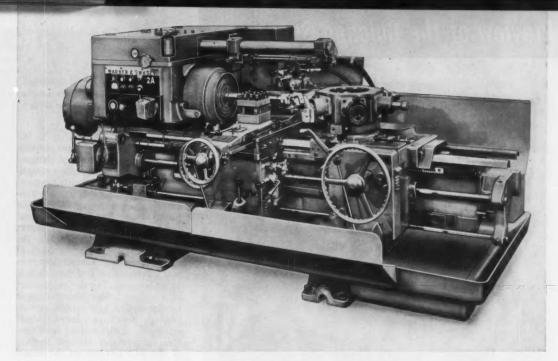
A Warner & Swasey saddle type turret lathe equipped with a tracing attachment
